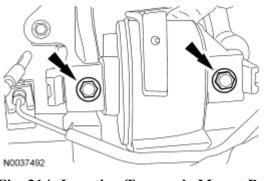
Locating Transaxle Mount Bolts Courtesy of FORD MOTOR CO.
